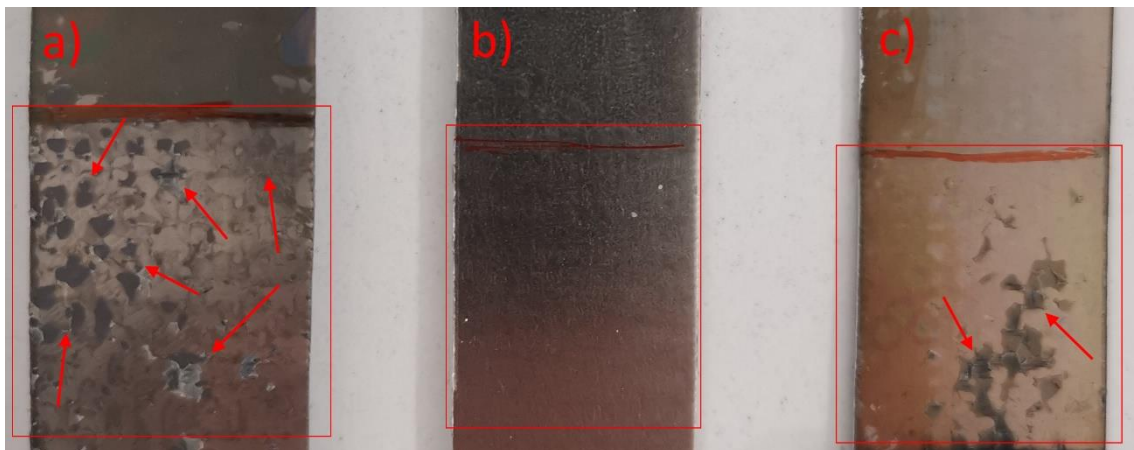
Fracture surface after DCB test with varying surface treatments - a) 30V50P; b) MT; c) SIL.
